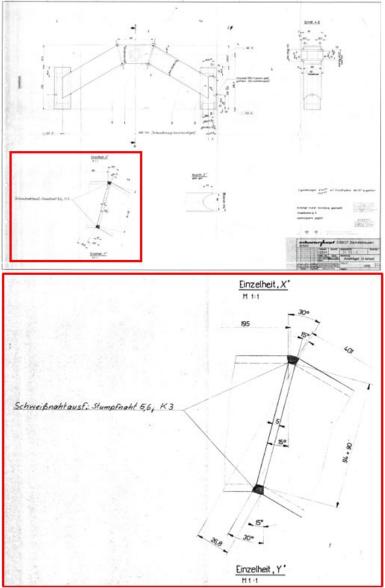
The entire drawing of the control arm from the order in 2019 is shown above. The image below shows an enlargement of the area in the square marking on the drawing. The measurements and infill (the black infill) for the weld in the joints in the square tubes closest to the middle of the control arm. The German word Einzelheit on the drawing means detail. Drawing from Gröna Lund (Appendix 1).
